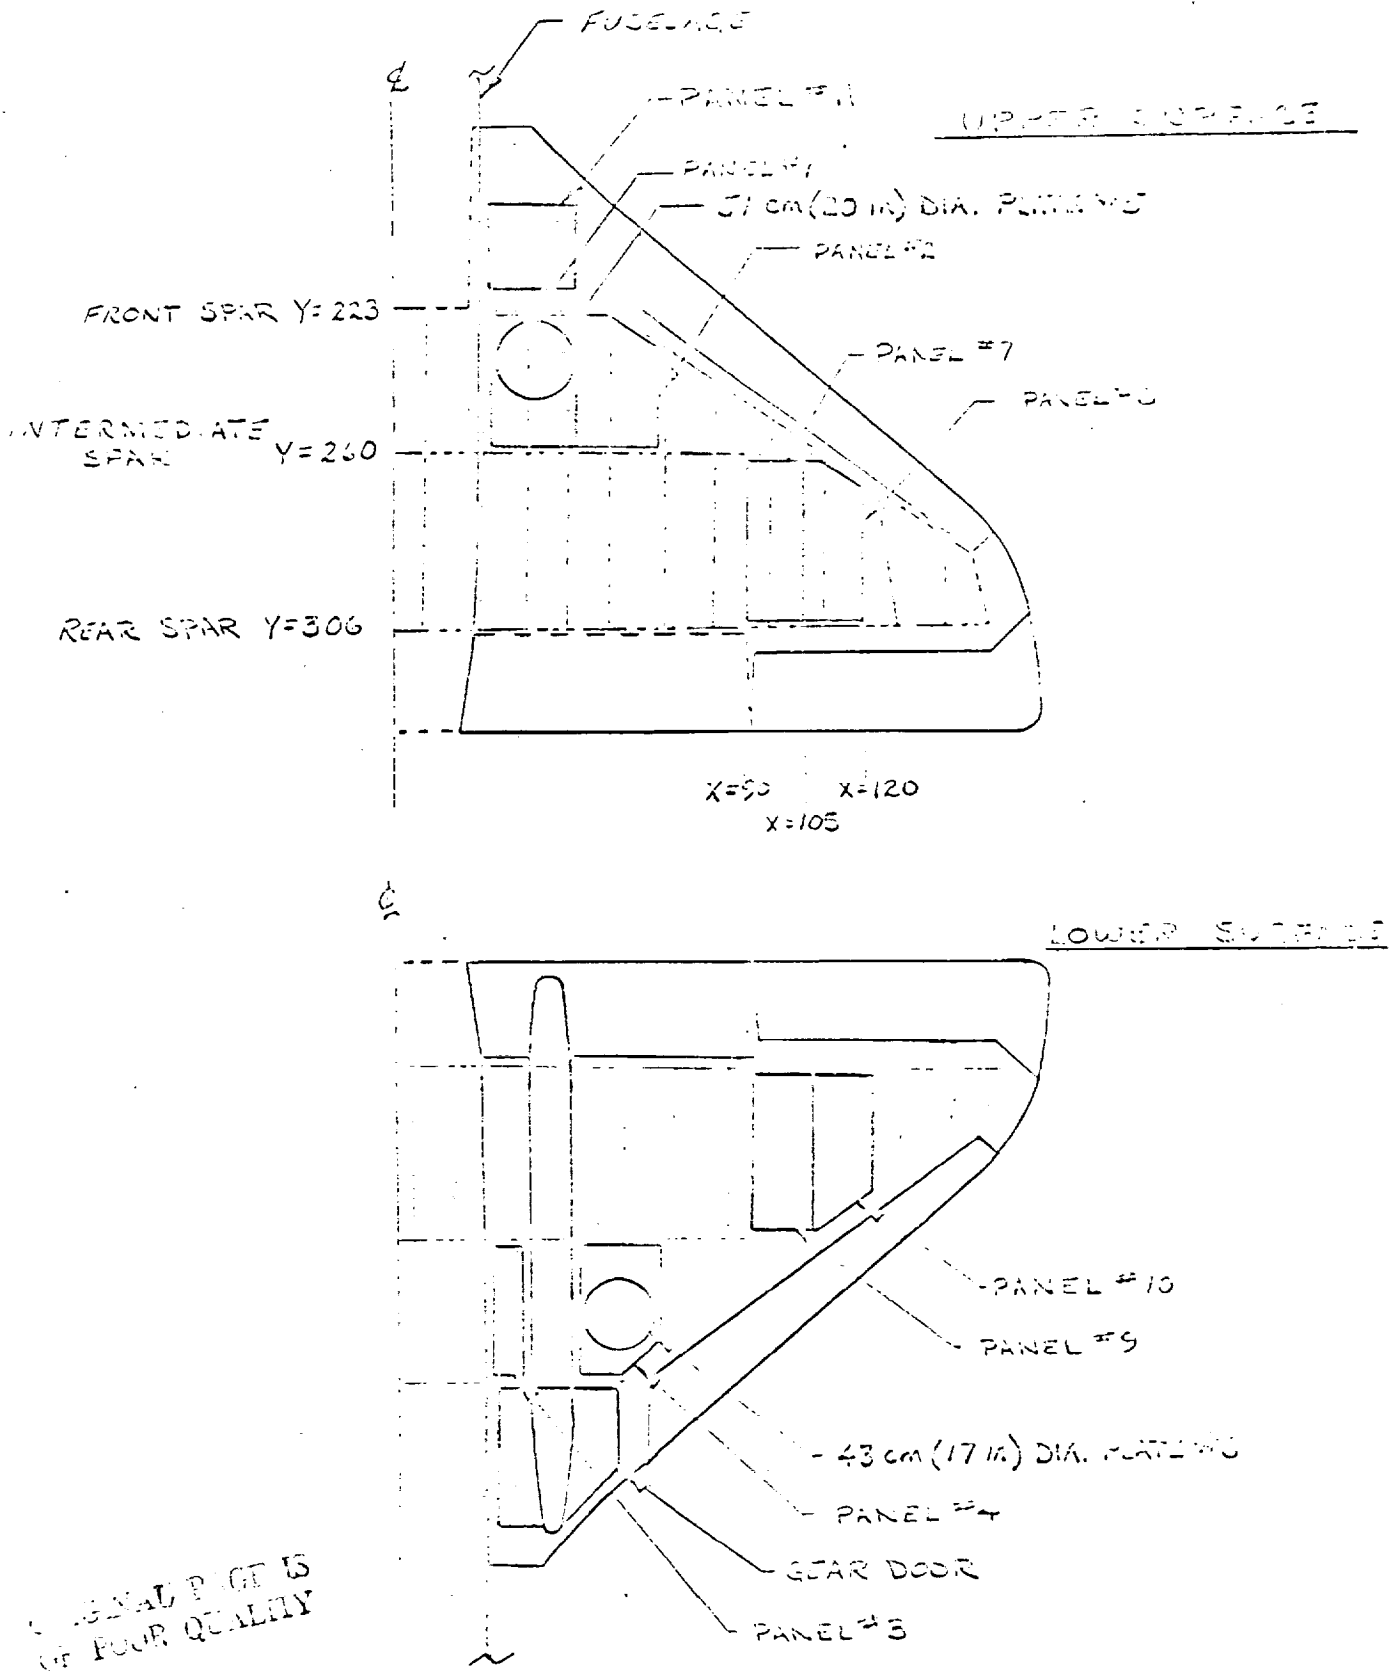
HOLE CONFIGURATION #11. PANEL 11 REMOVED AND GEAR DOOR OPEN
